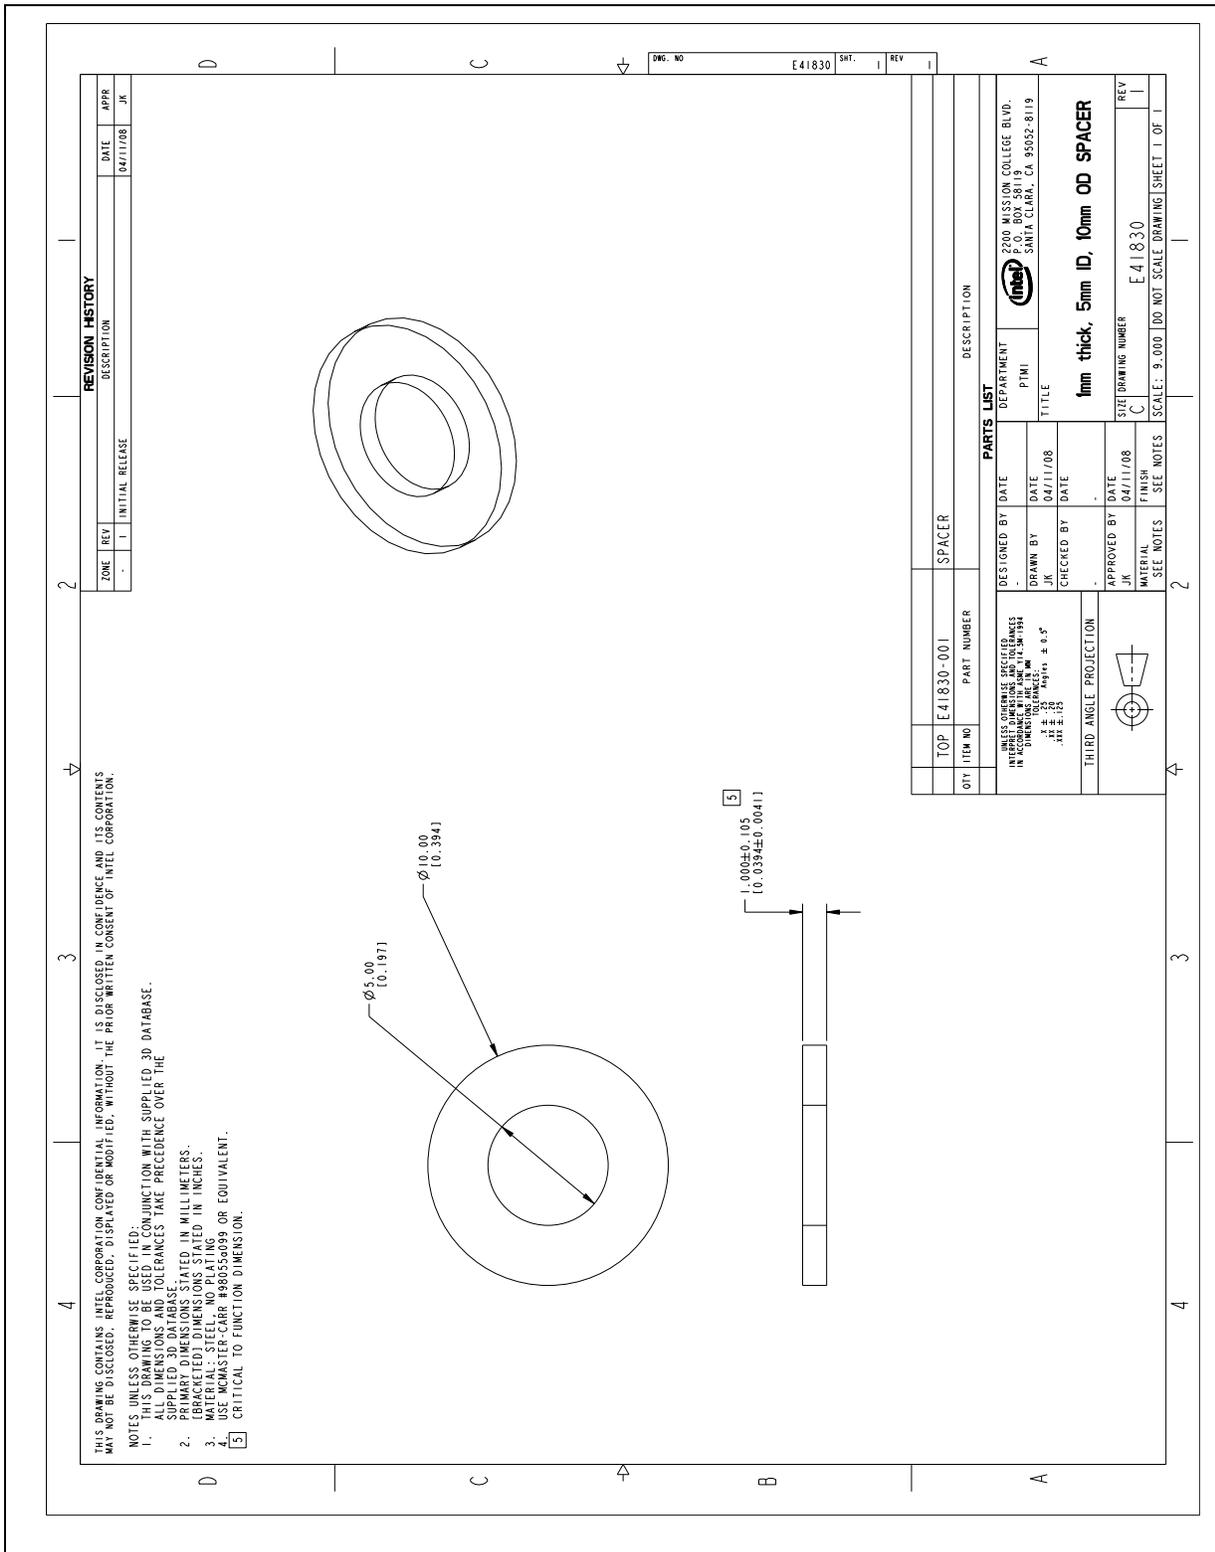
Tower Heatsink Drawing – Sheet 10 of 14
